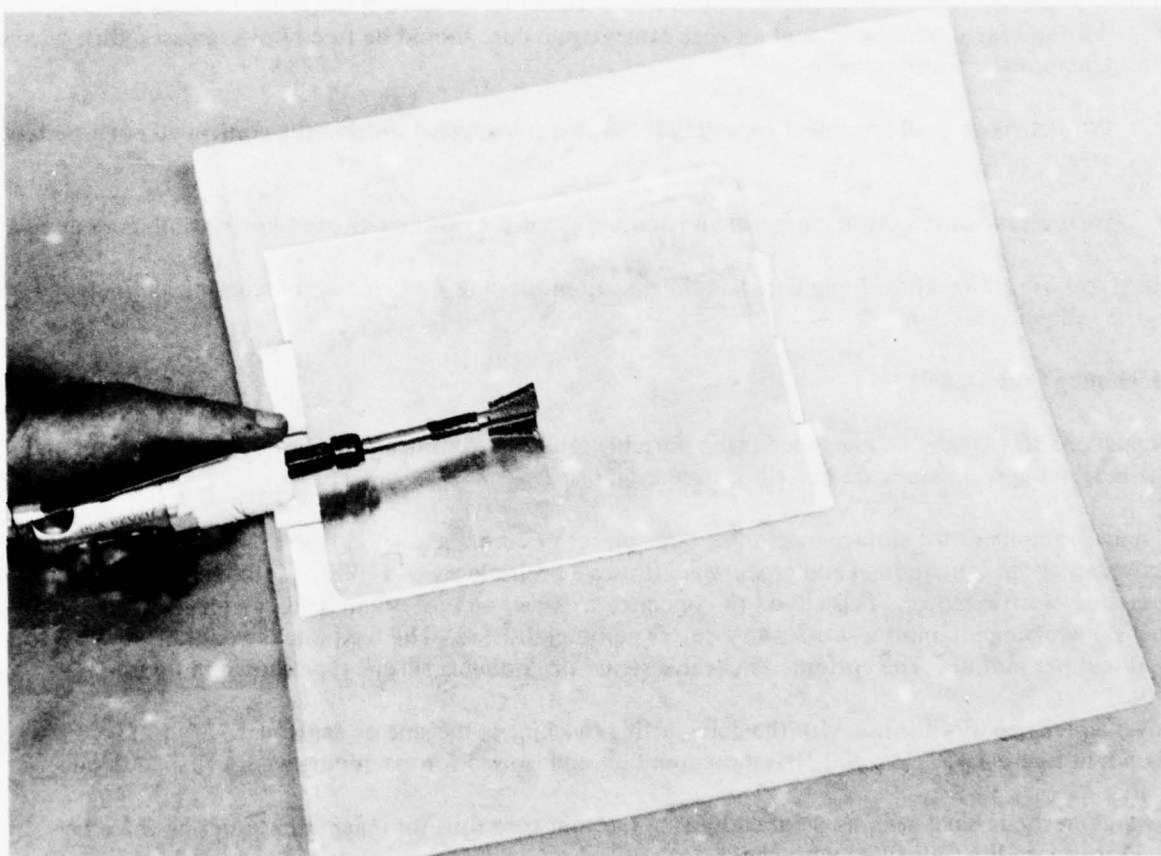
Roto-Peen Being Used to Form Small Sheet Metal Detail
